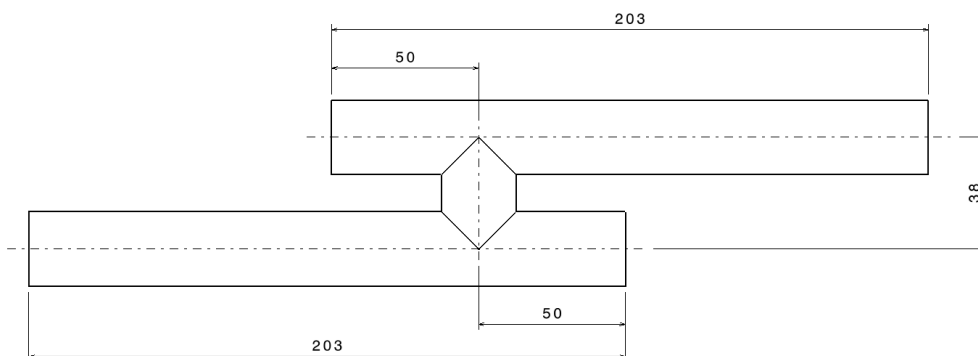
Rule 3.6.2 describing the weld test for SES.
